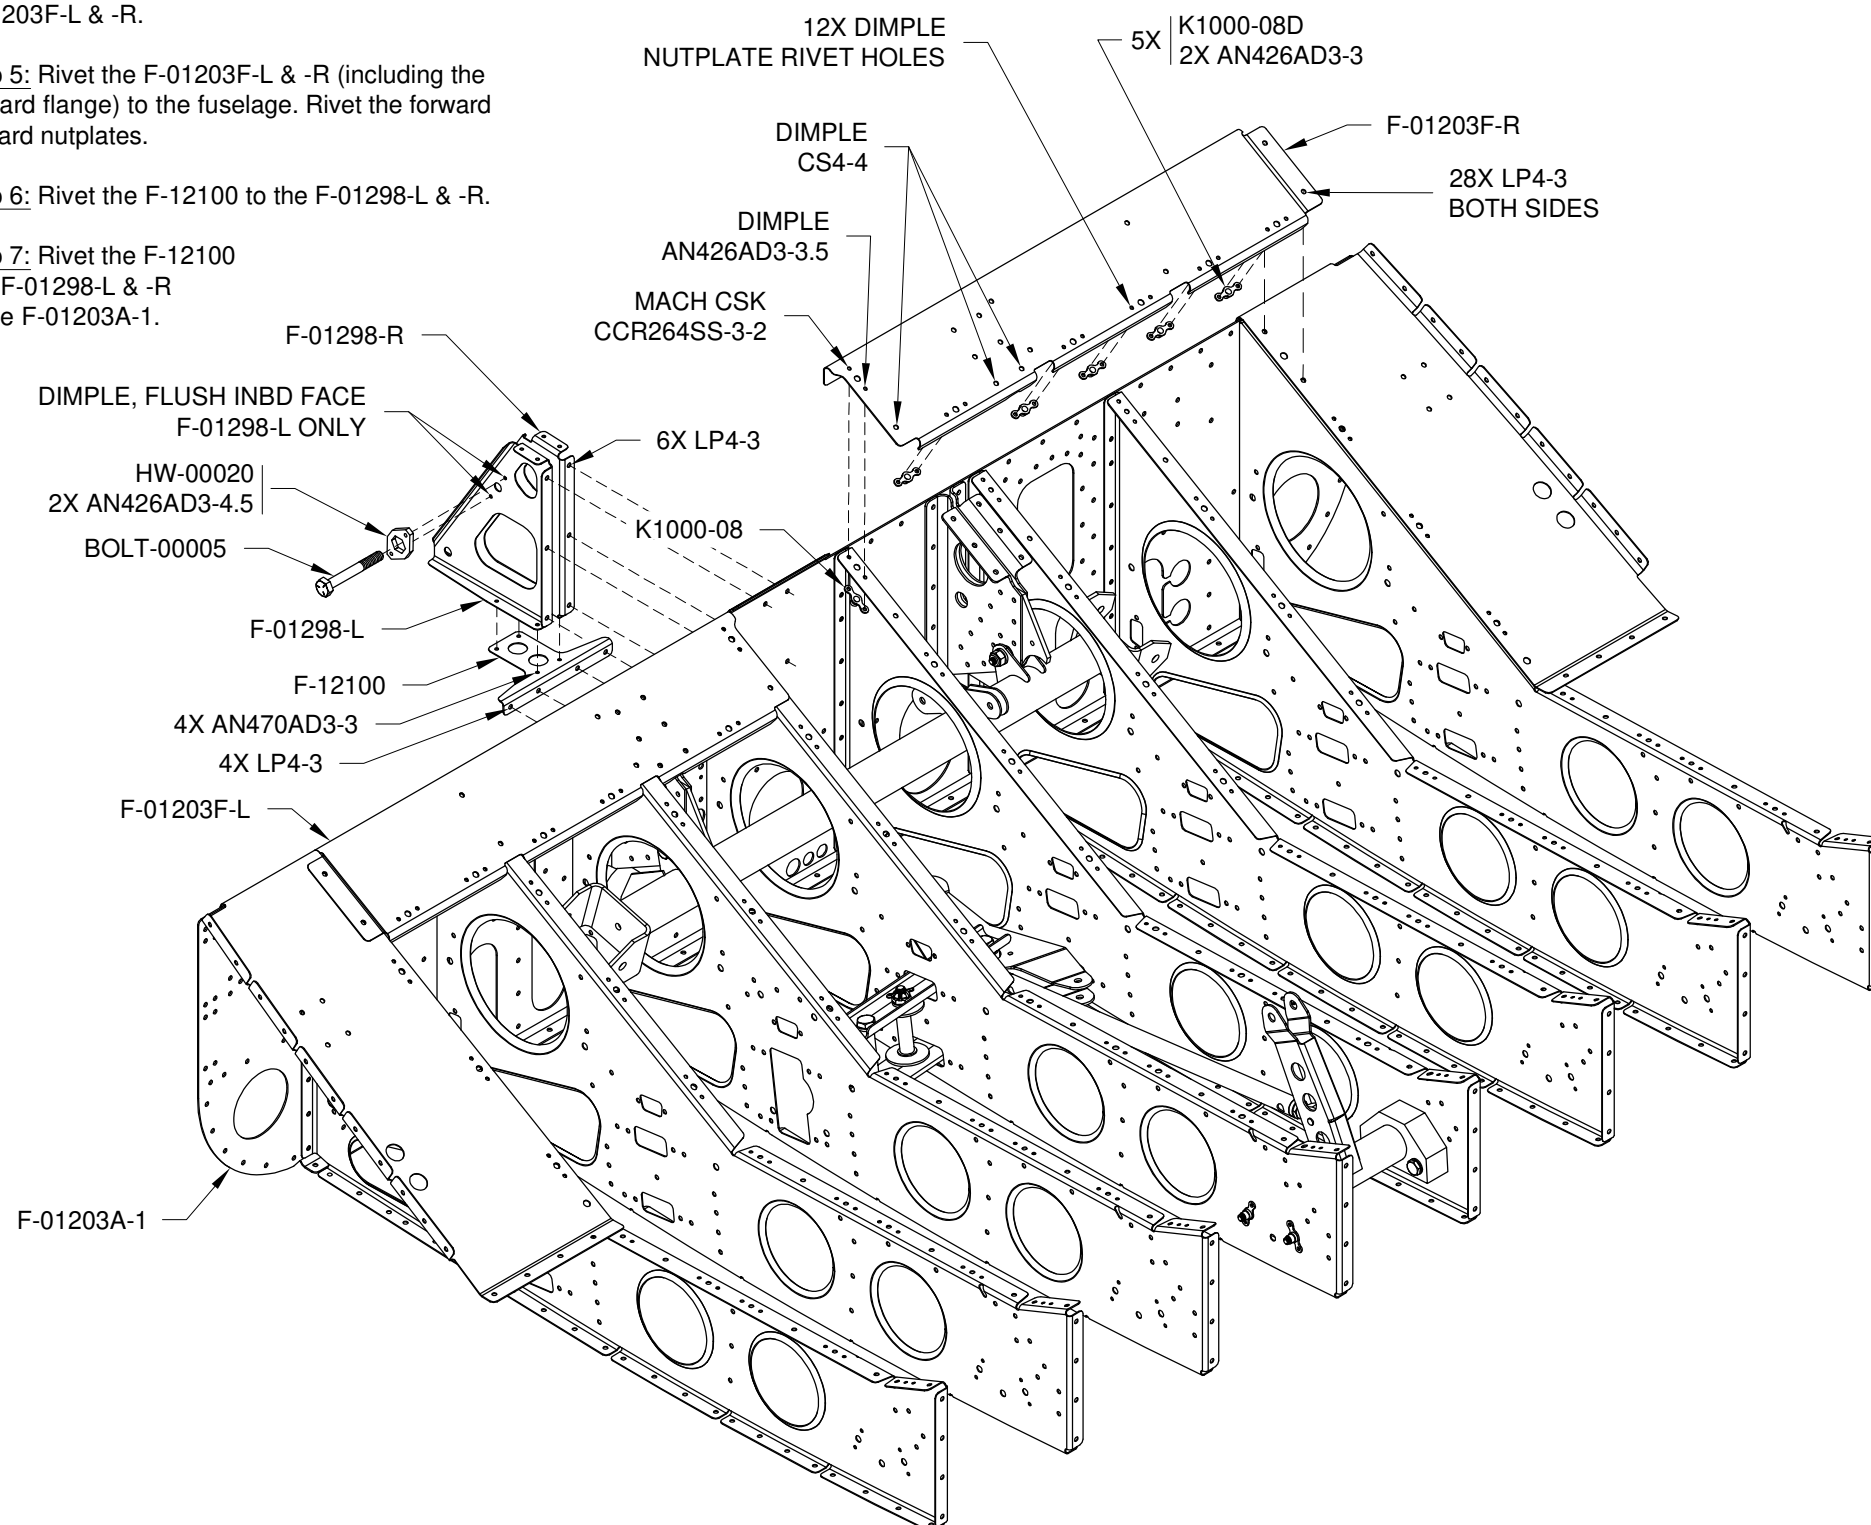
ATTACHING THE SEAT RAMP FLOORS & THROTTLE LEVER BRACKETS
